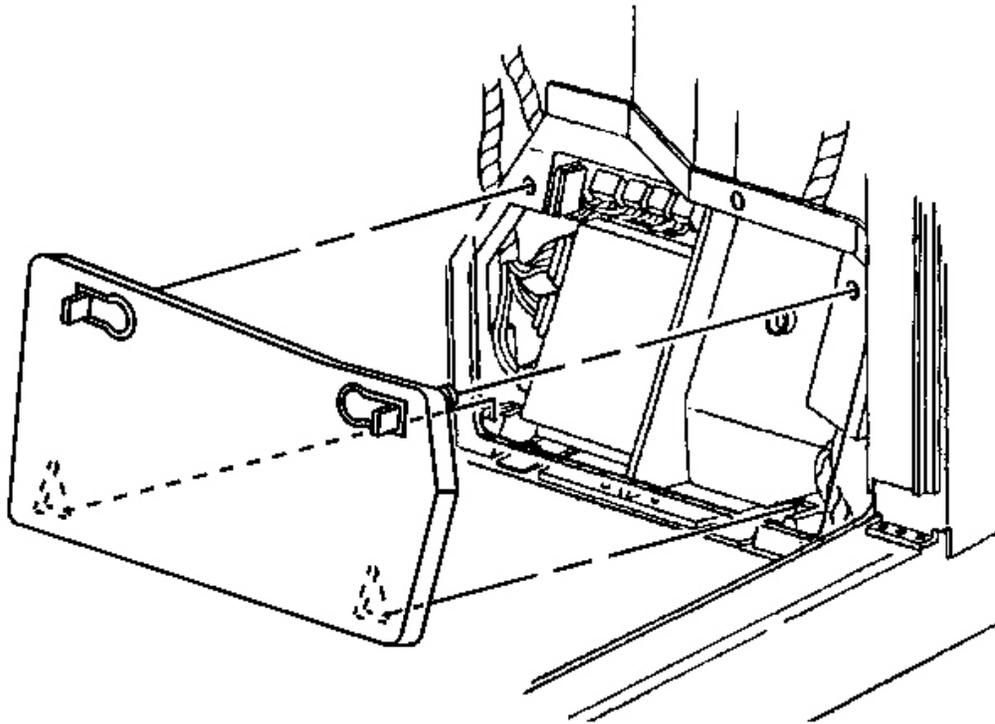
Kick-Up Panel Latches & Multi-Use Relay Bracket
